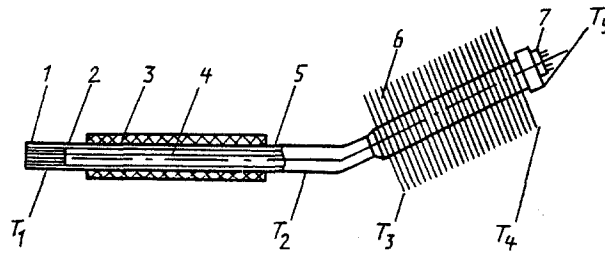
Design of the heat pipe: 1) heat flux sensor; 2) heat pipe evaporator; 3) heat insulation; 4) tube for leading out measuring wires; 5) transport zone of the HP; 6) condenser; 7) connector for the measuring instrument.
